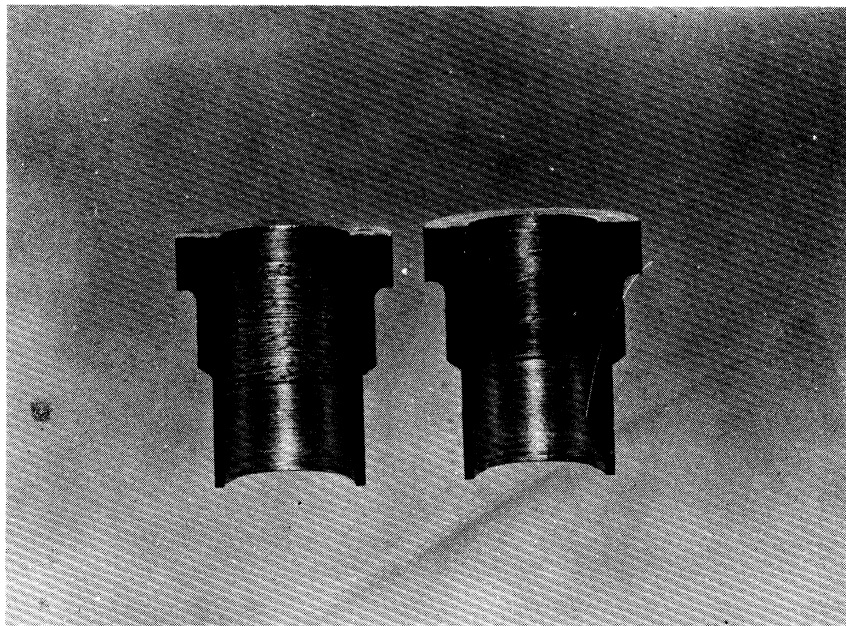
Material 111. View of drilled surface produced on piece No. 3 (left) and piece No. 2450 (right) at end of run.
